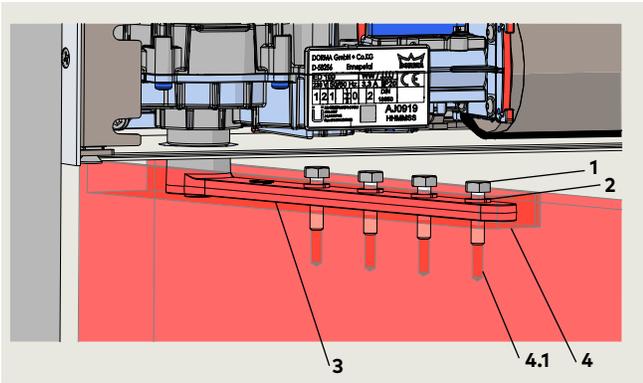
Door bottom pivot on floor pivot bearing
